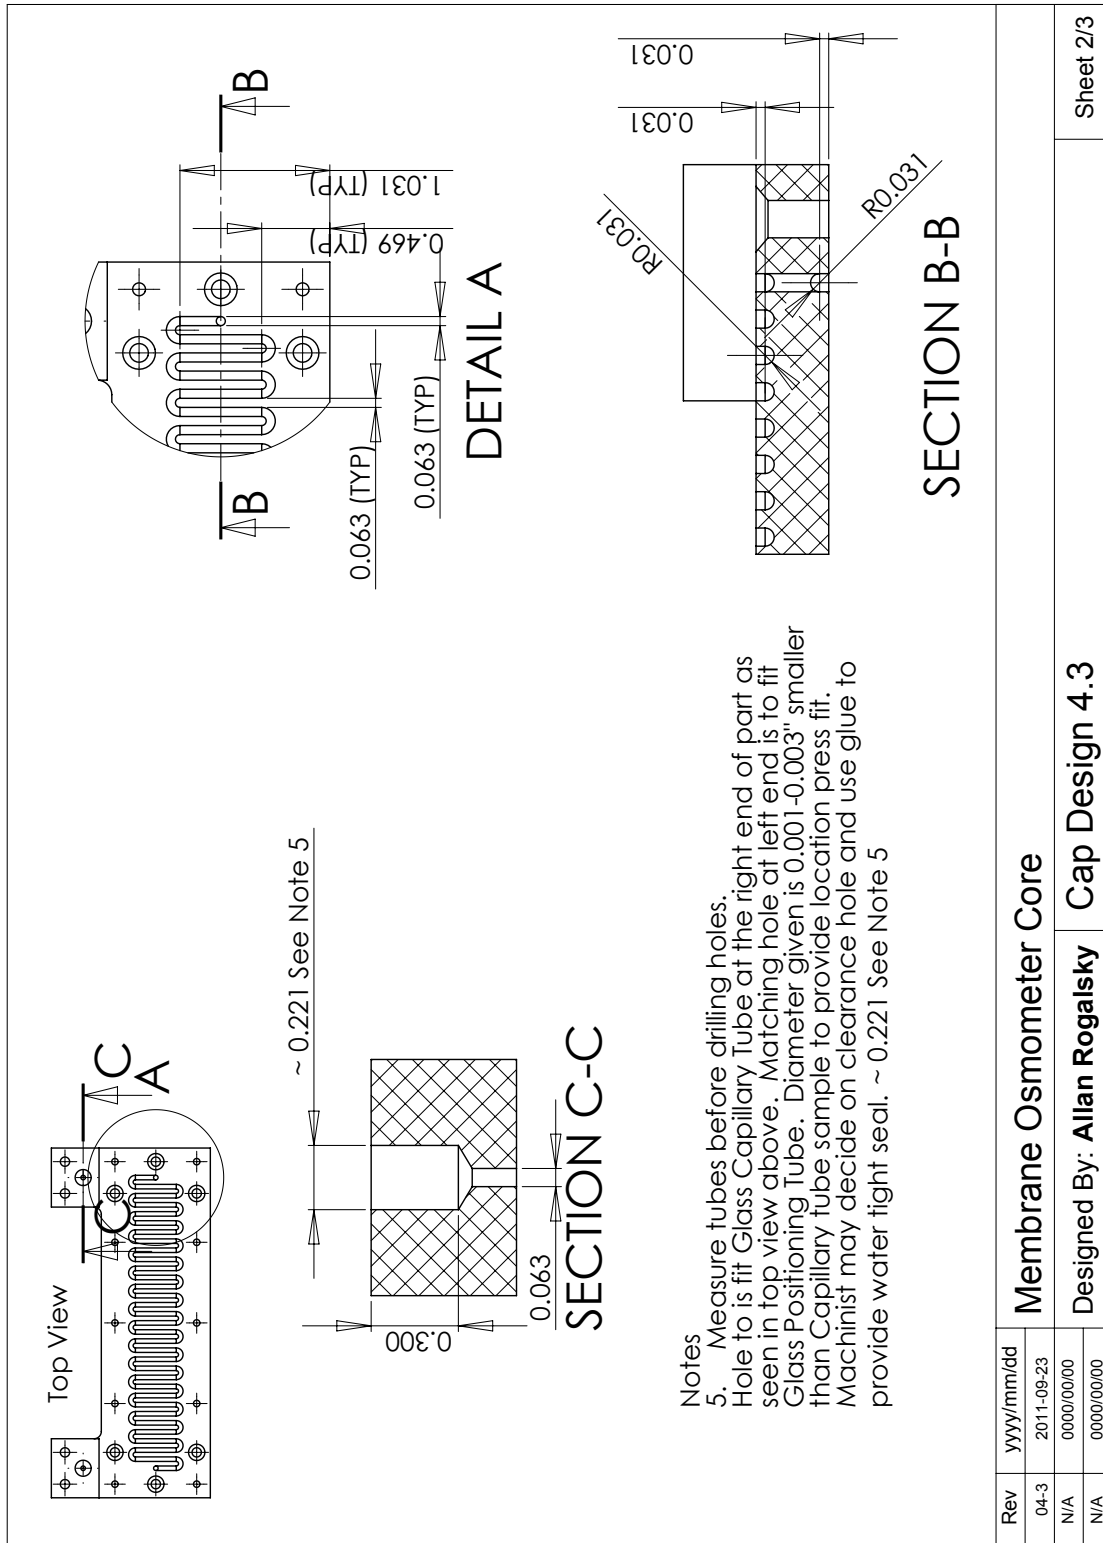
Osmometer Top Level 4.0 / Core Assembly / Cap / Sheet 2
